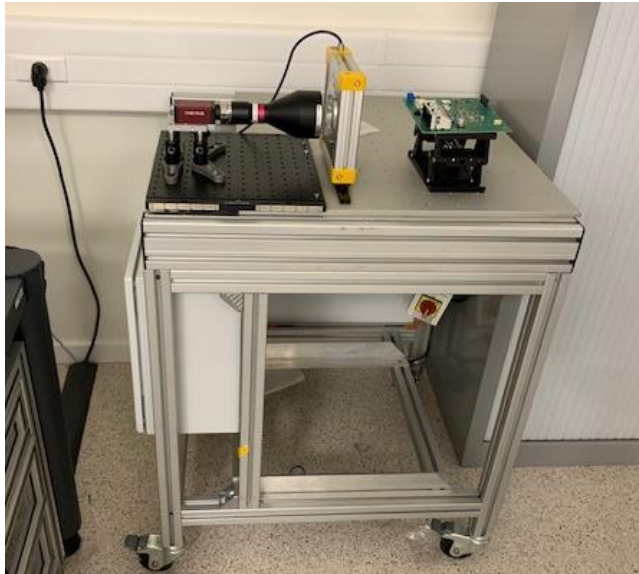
First Connector Inspection Machine Prototype for SCU Analysis: Camera, Telecentric Lens and Flat Dome.
